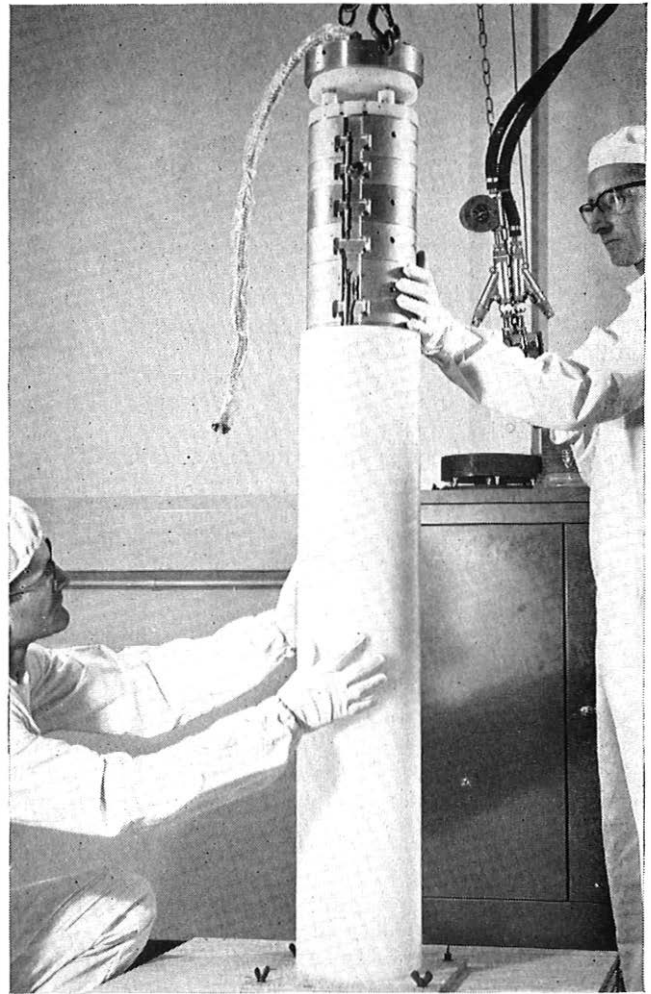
INTERNAL UNIT BEING INSERTED INTO POLYTHENE TUBE
